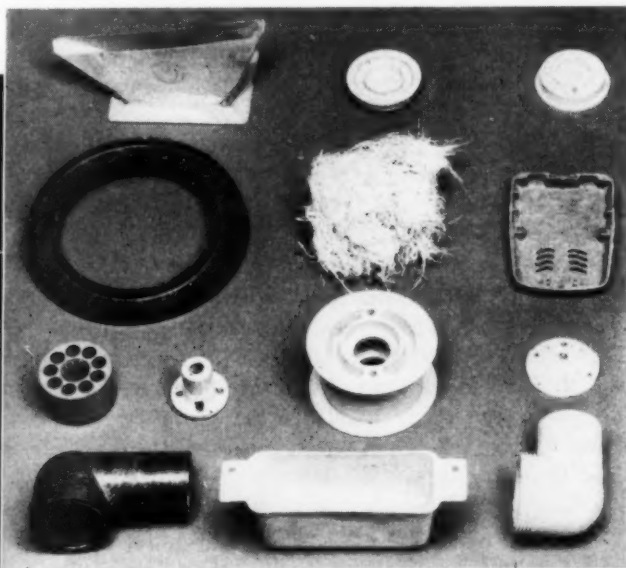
Parts molded from resins combined with glass fiber (sample shown upper center). Photo courtesy Flex Firm Products Co.
